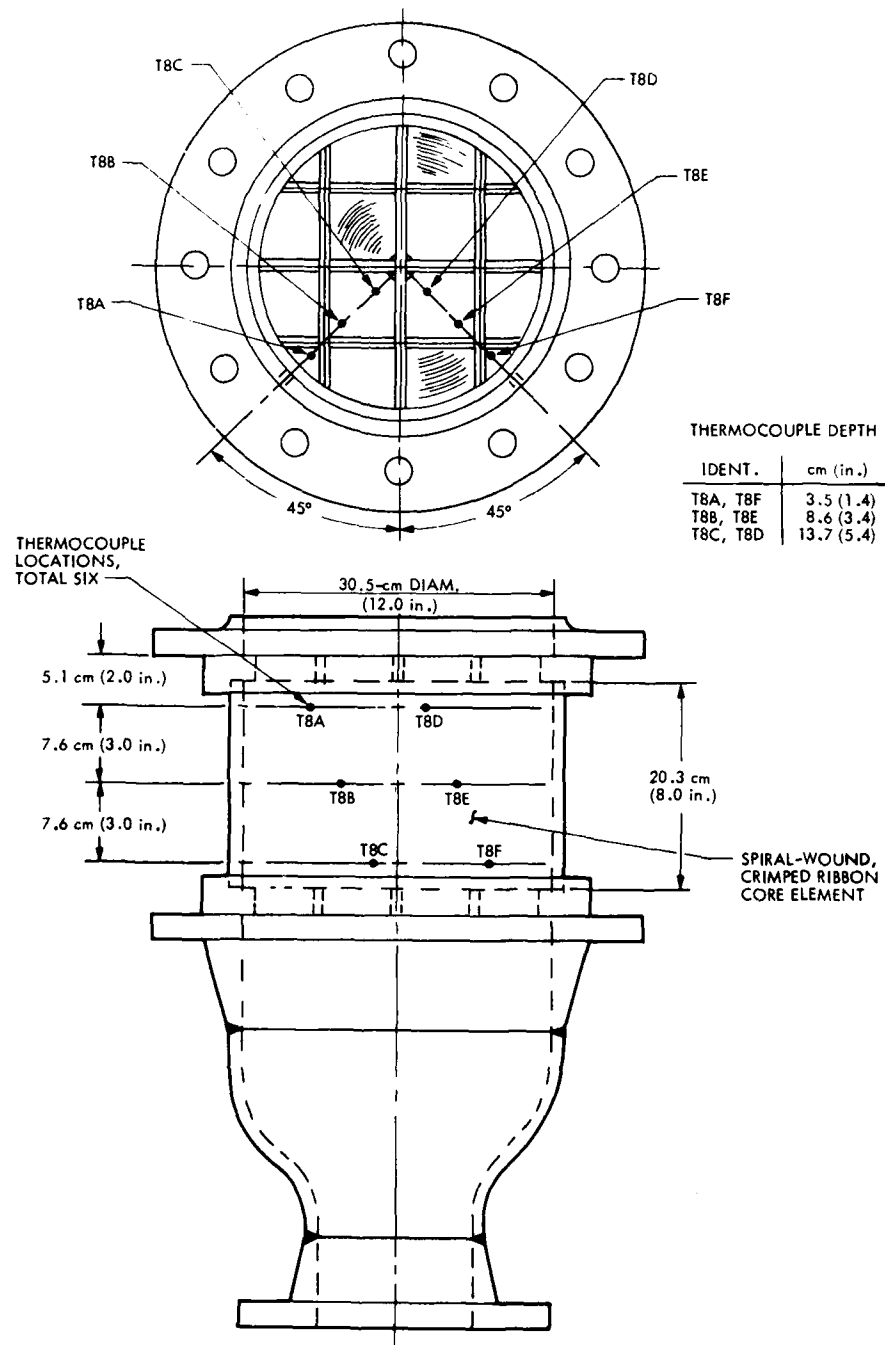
Spiral-Wound, Crimped Stainless-Steel Ribbon Arrester Test Assembly Schematic Drawing
